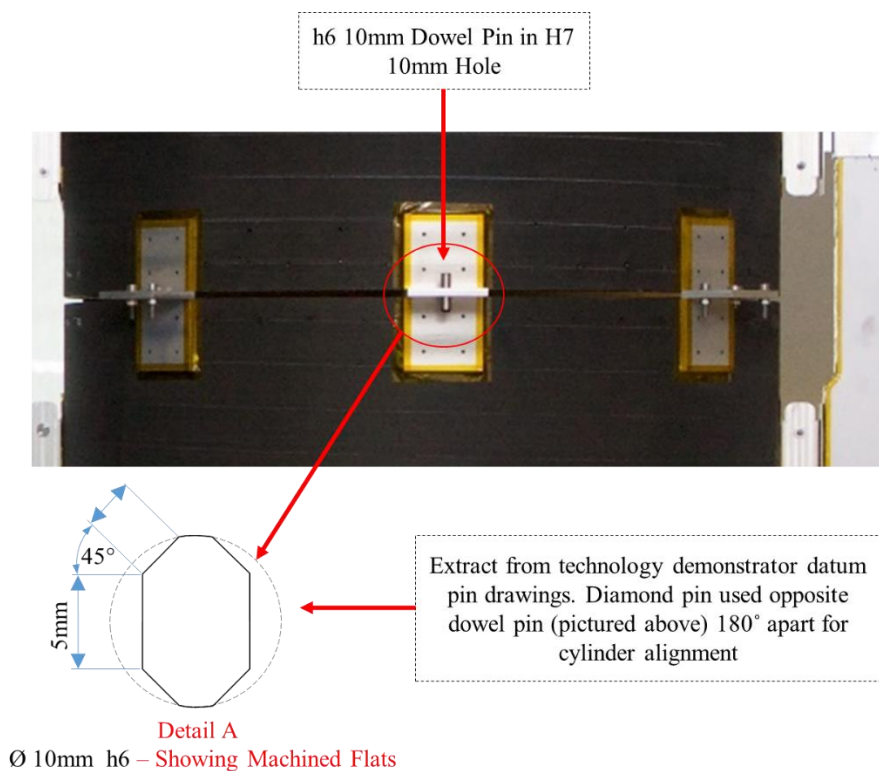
Mid to upper cylinder alignment and assembly using h6 dowel and datum pins within H7 bracket holes. Image showing dowel pin and extract from diamond pin drawing for illustration purposes only.
